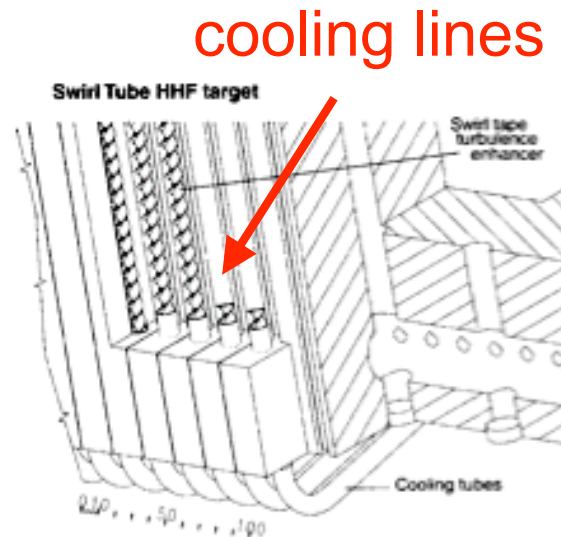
Detail of the reference CFC monoblock swirl tube design (scale in millimetres). The expansion pipes on the bottom and the swirl tape turbulence enhancer inside the tube can be seen.
